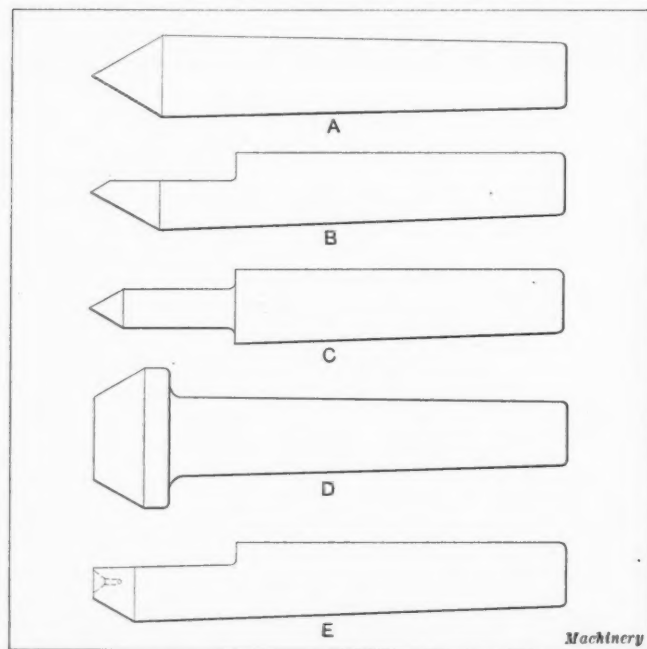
Collection of Different Shaped Centers for supporting Work in Cylindrical Grinding Machines
